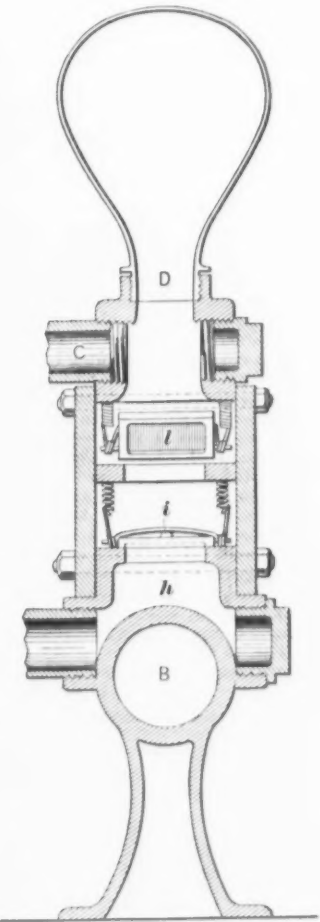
Cross-Section of Water Cylinder, Showing Valves.
